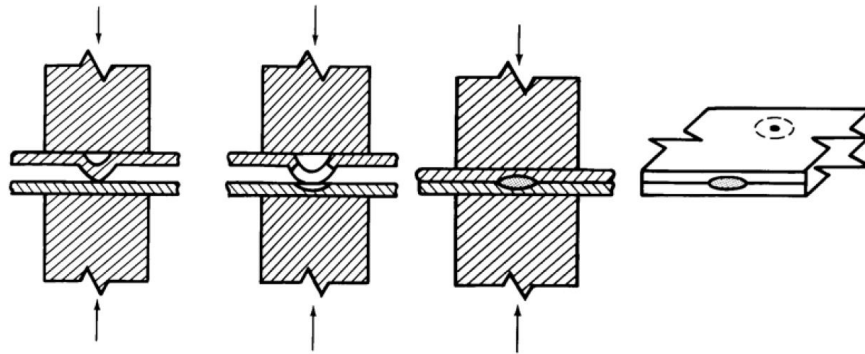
Delta Spot Aluminum welding (Dulal Chandra Saha, 2011)
